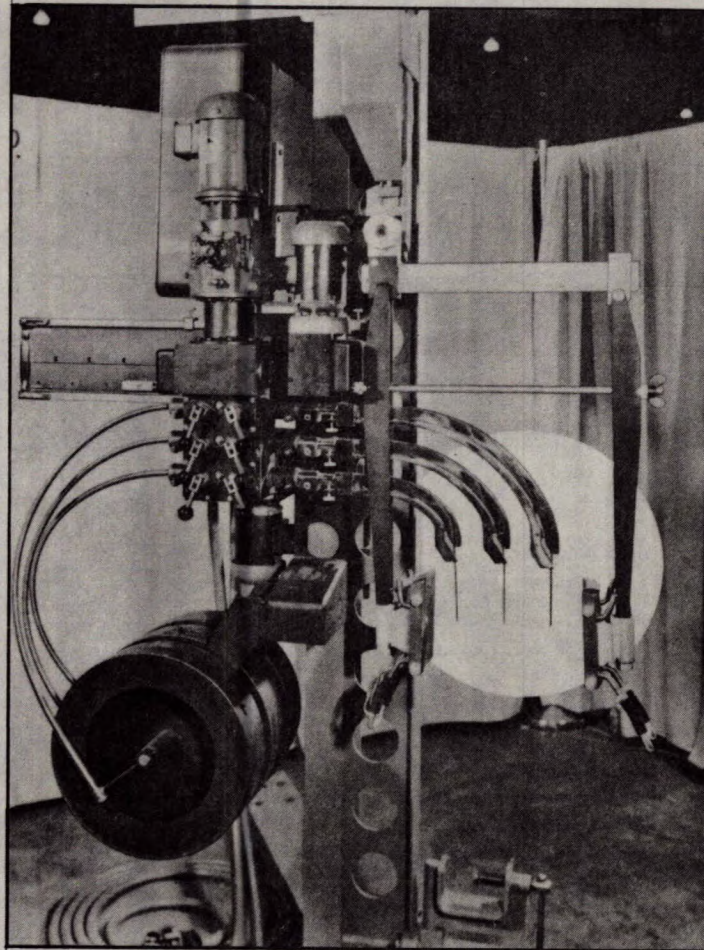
Electro-slag welding equipment available in the United States. The model shown has three separate wire feeds. (Vertomatic equipment by Arcos Corp.)
